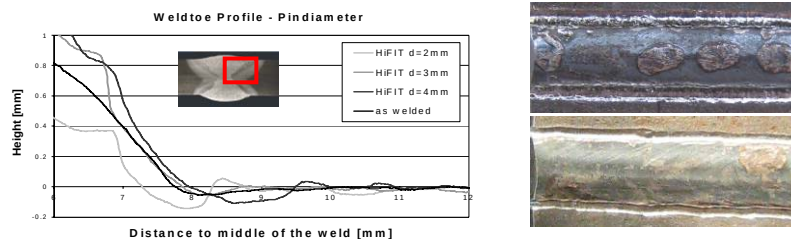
Weld toe profile before and after the treatment with different pin diameters (left), weld toe after UIT(upper right) and HiFIT (lower right)
